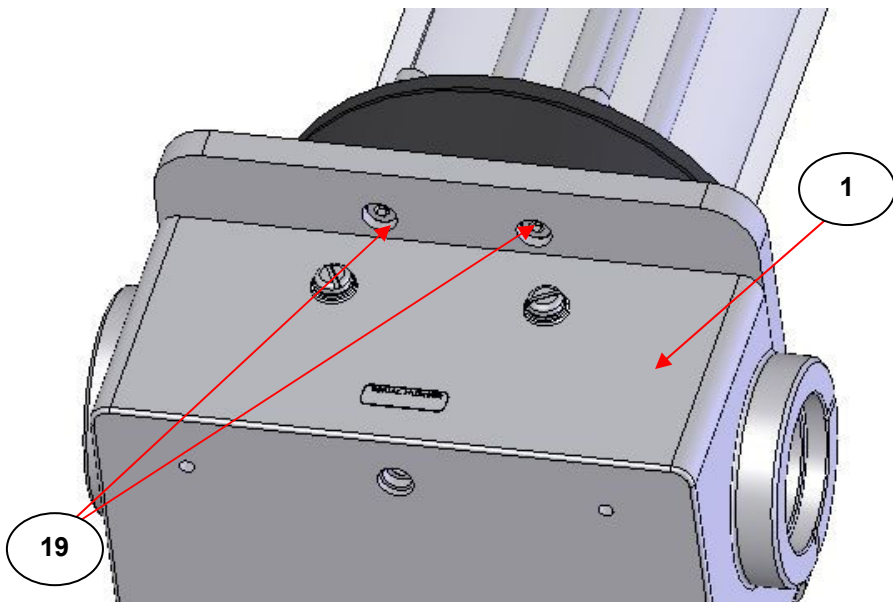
Rear View of Tornado™ T5 Gas Cell Showing Fixing Screws (19) for Gas Cell to the Optical Unit (1)
